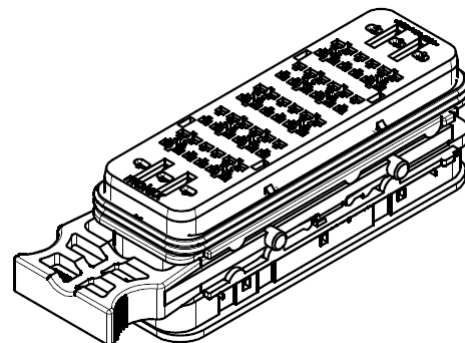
SRC 60+6 Mixed Power Female Receptacle Assembly Housing Mating Interface
